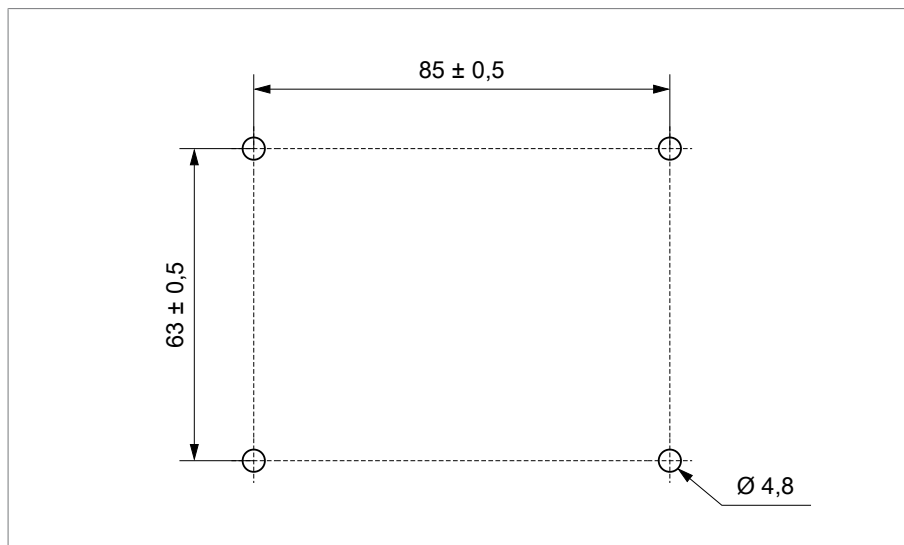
Dimensional drawing for holes in the bushing coupling unit's retaining plate (dimensions in mm)
